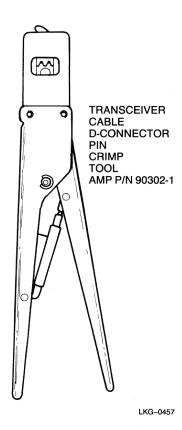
Transceiver Cable D-Connector Pin Crimp Tool
